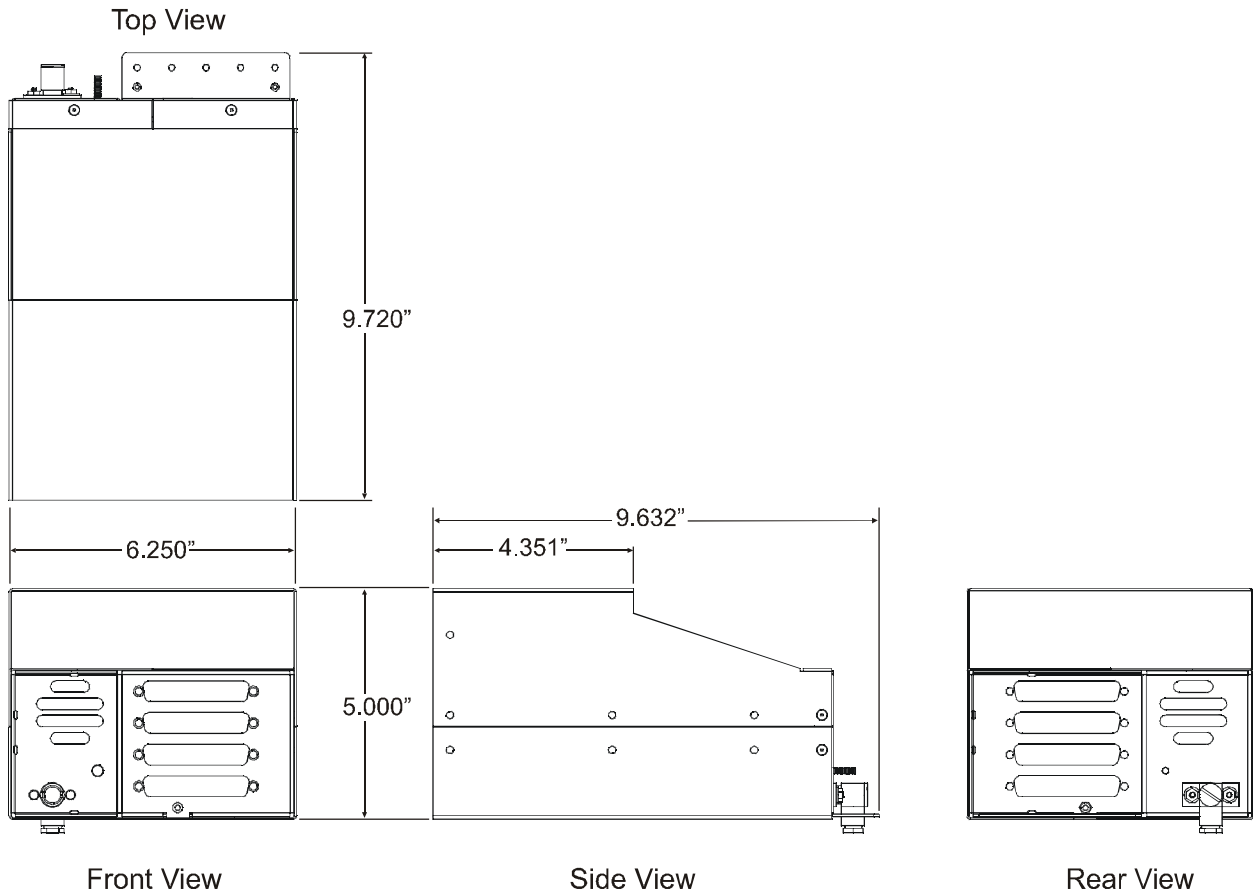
MX20 Mounting Tube Assembly Dimensions
